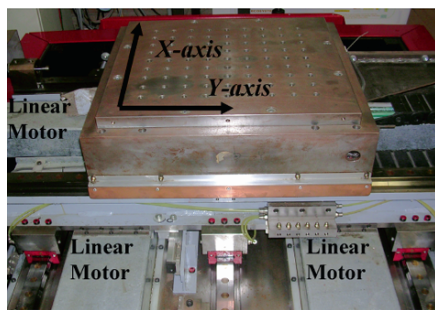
A xy feed table with three linear drives for high speed milling application.
